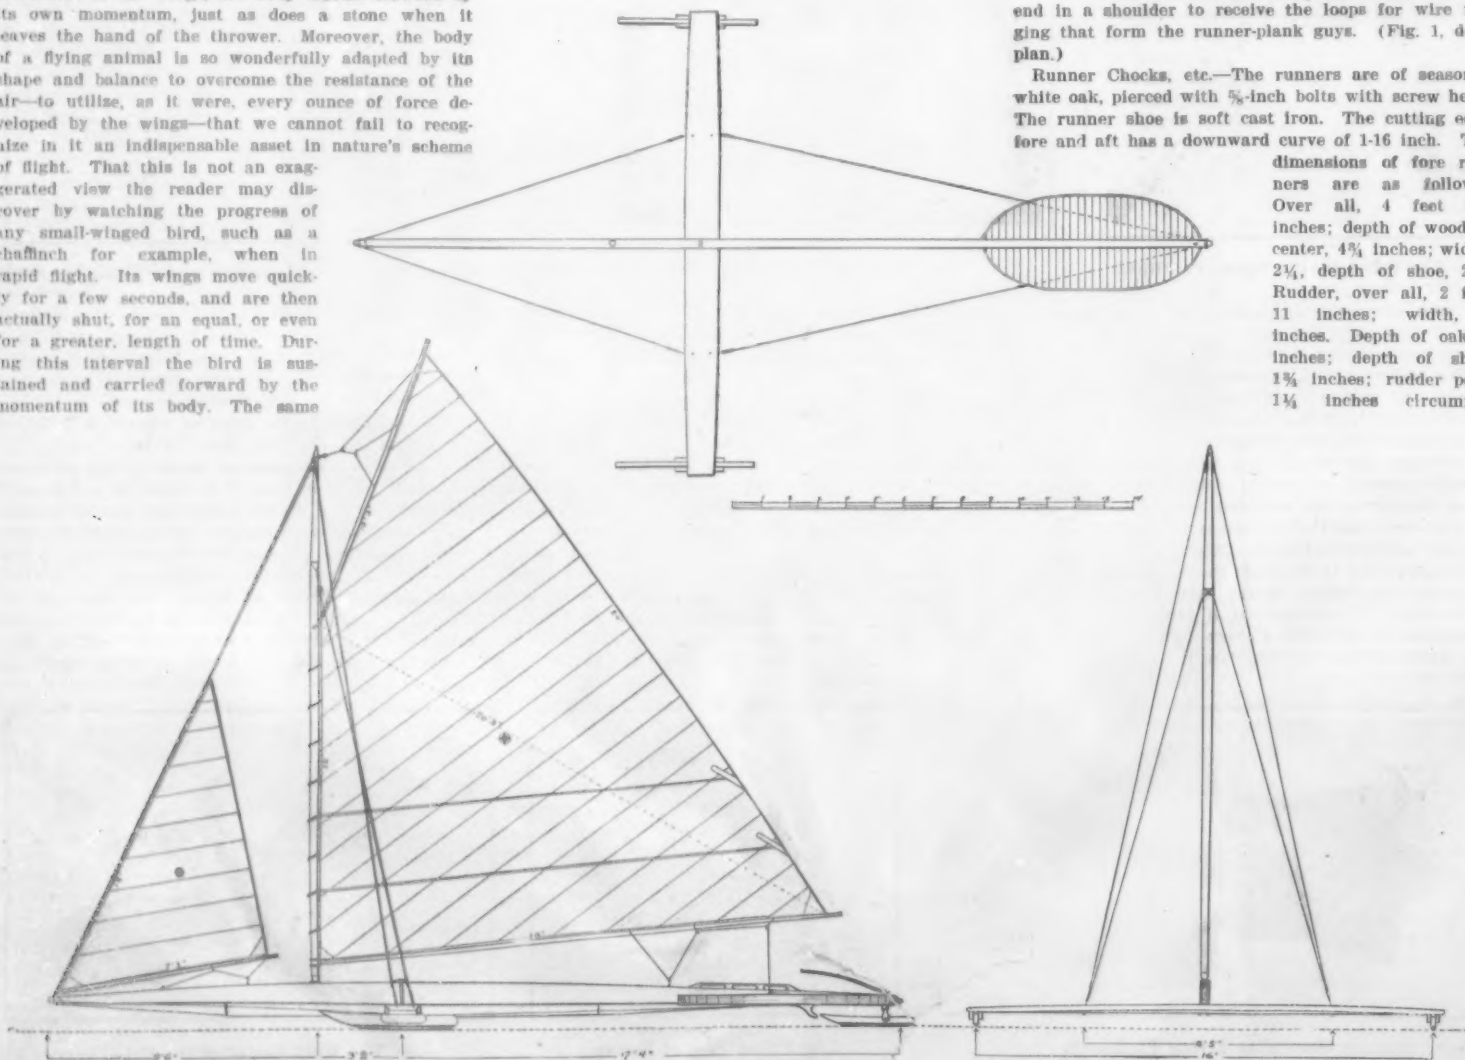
ICE YACHT CONSTRUCTION.—PLAN OF SAIL AND RIGGING.
